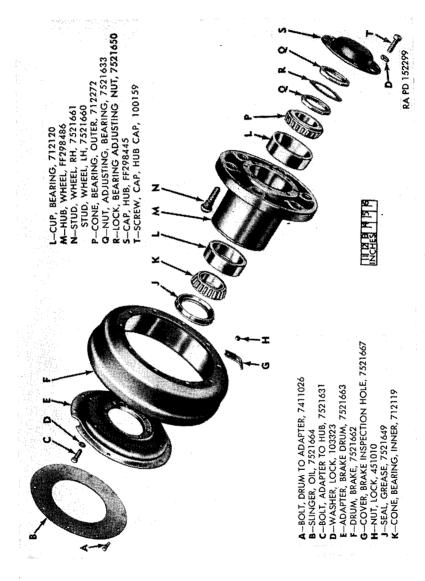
Exploded view of hub, brake drum, and mounting parts.
